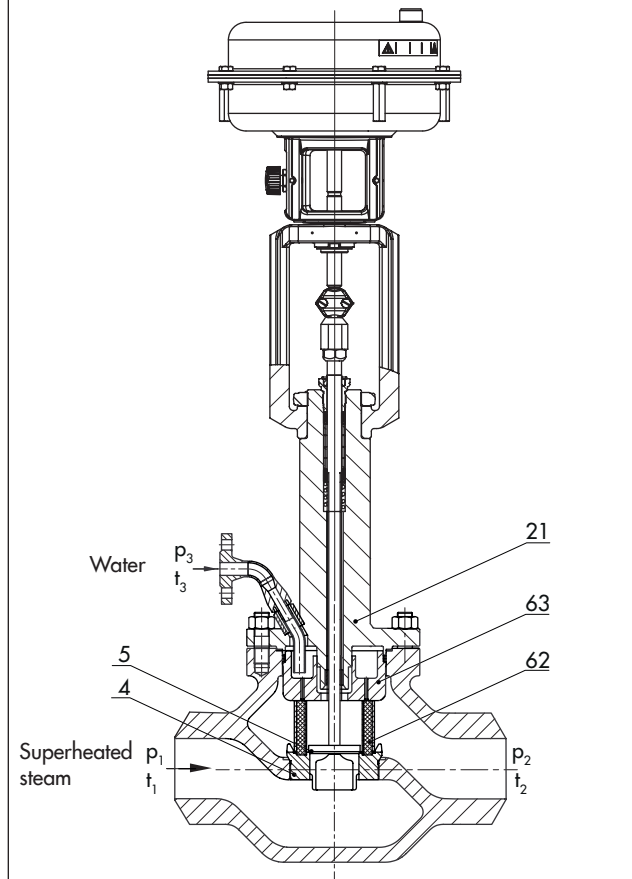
Type 3281-7 Pneumatic Steam Conditioning Valve with insulating section, welding ends and Type 3277 Actuator
